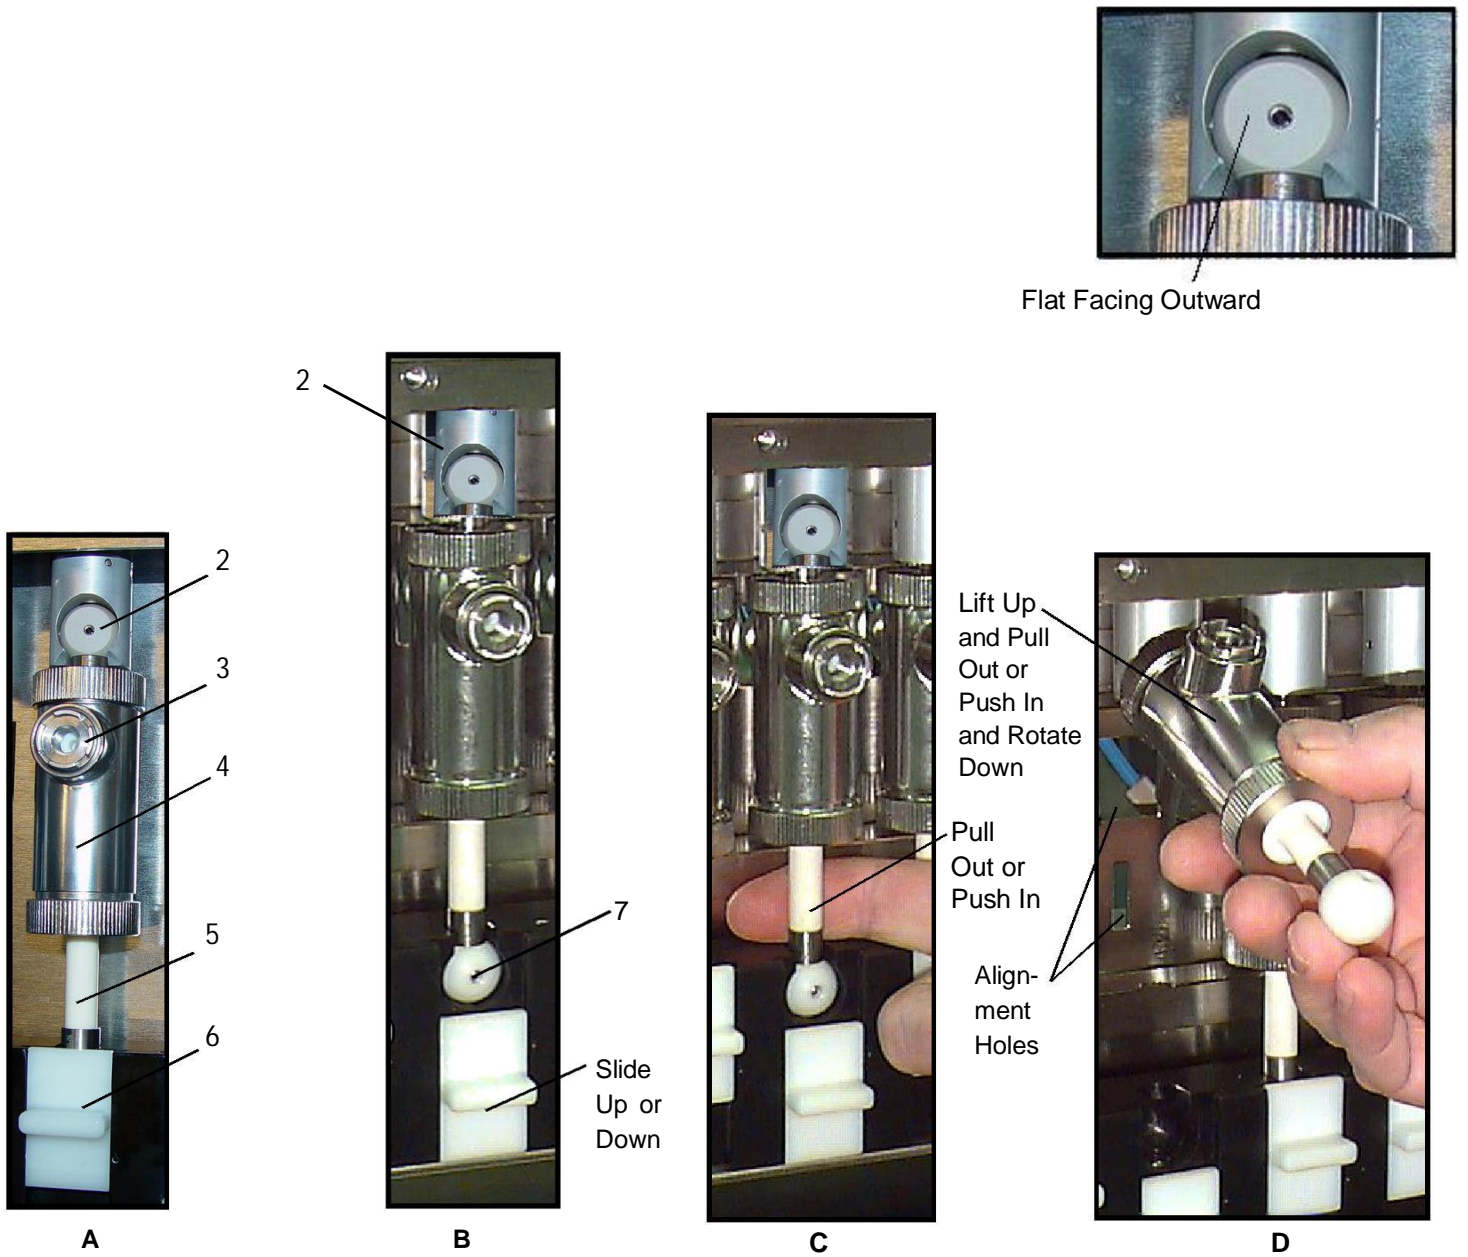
LF Multiplex Pump Module Assembly/Disassembly
